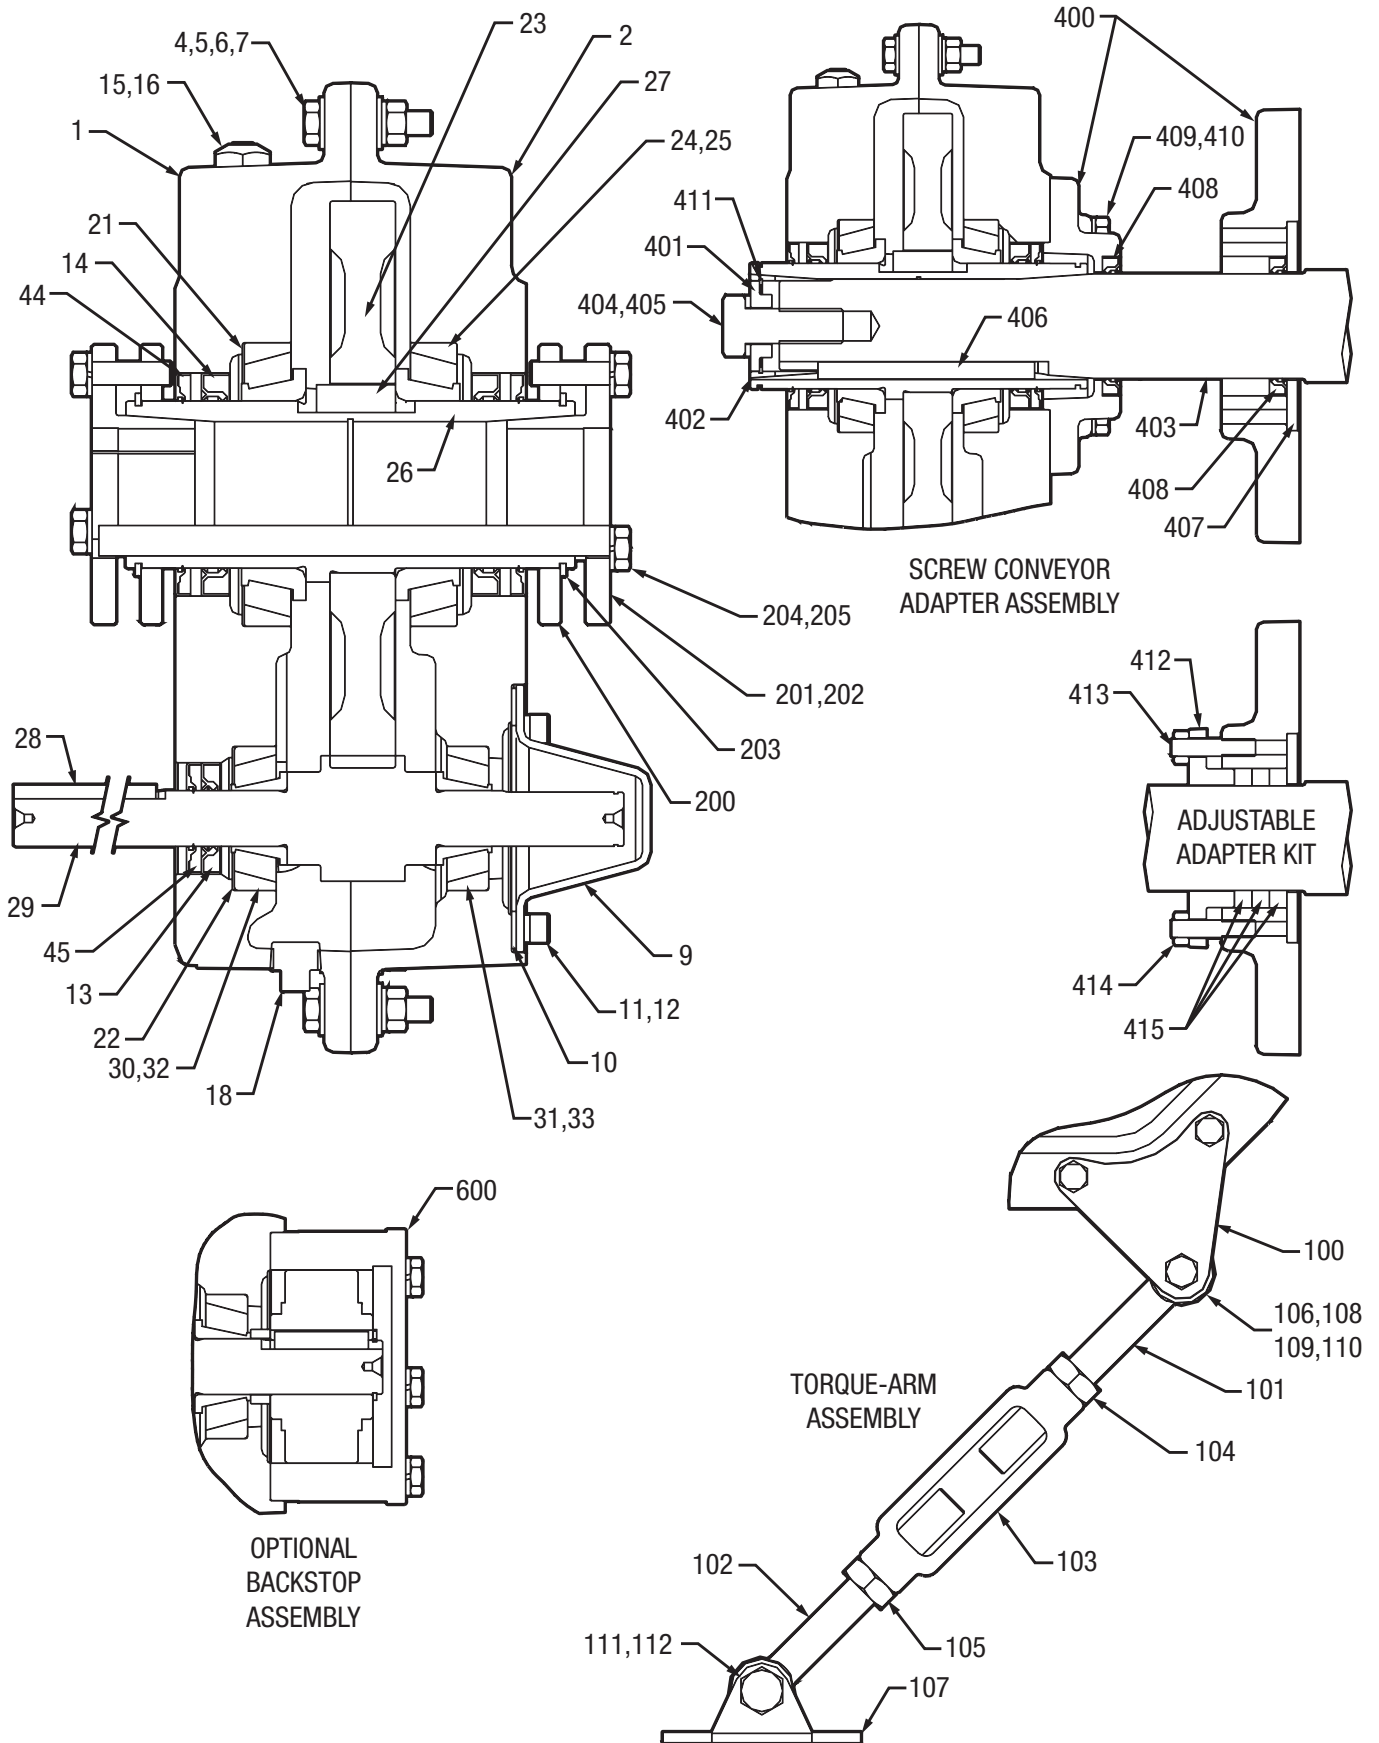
Parts for TA0107L through TA7315H Taper Bushed Single Reduction Reducers
